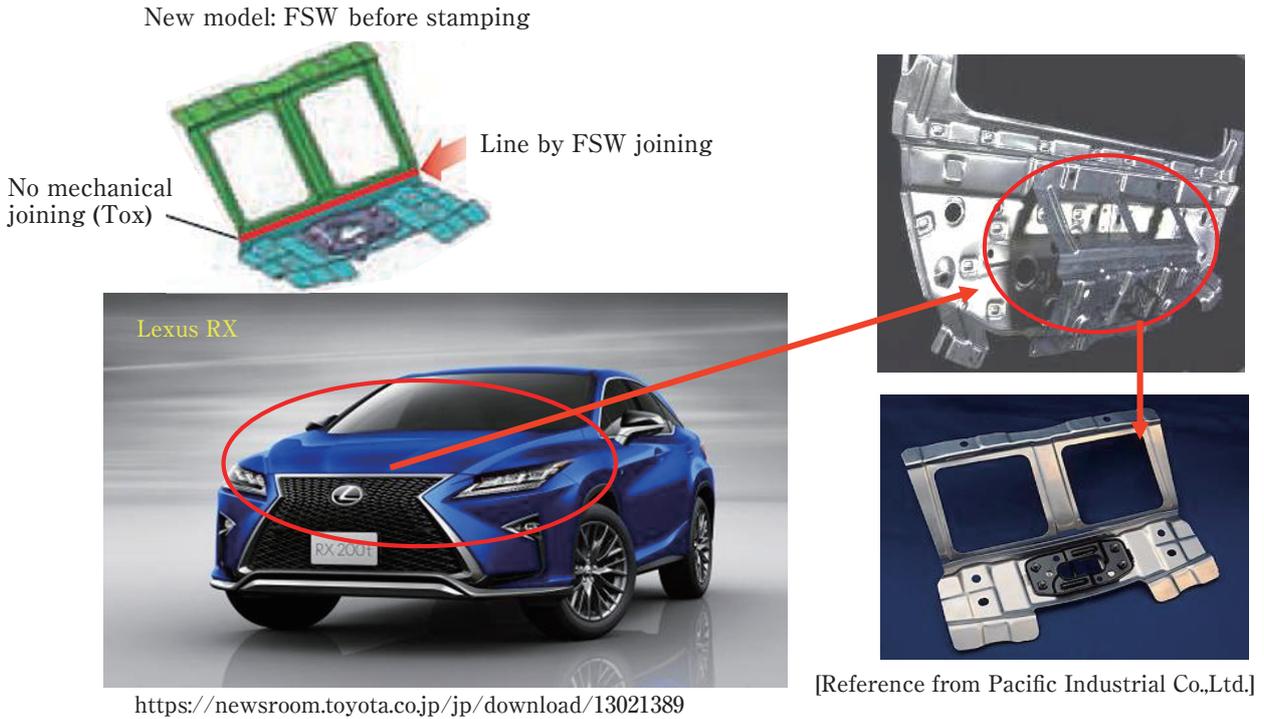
Tailored blanking aluminum sheet welded by FSW.
